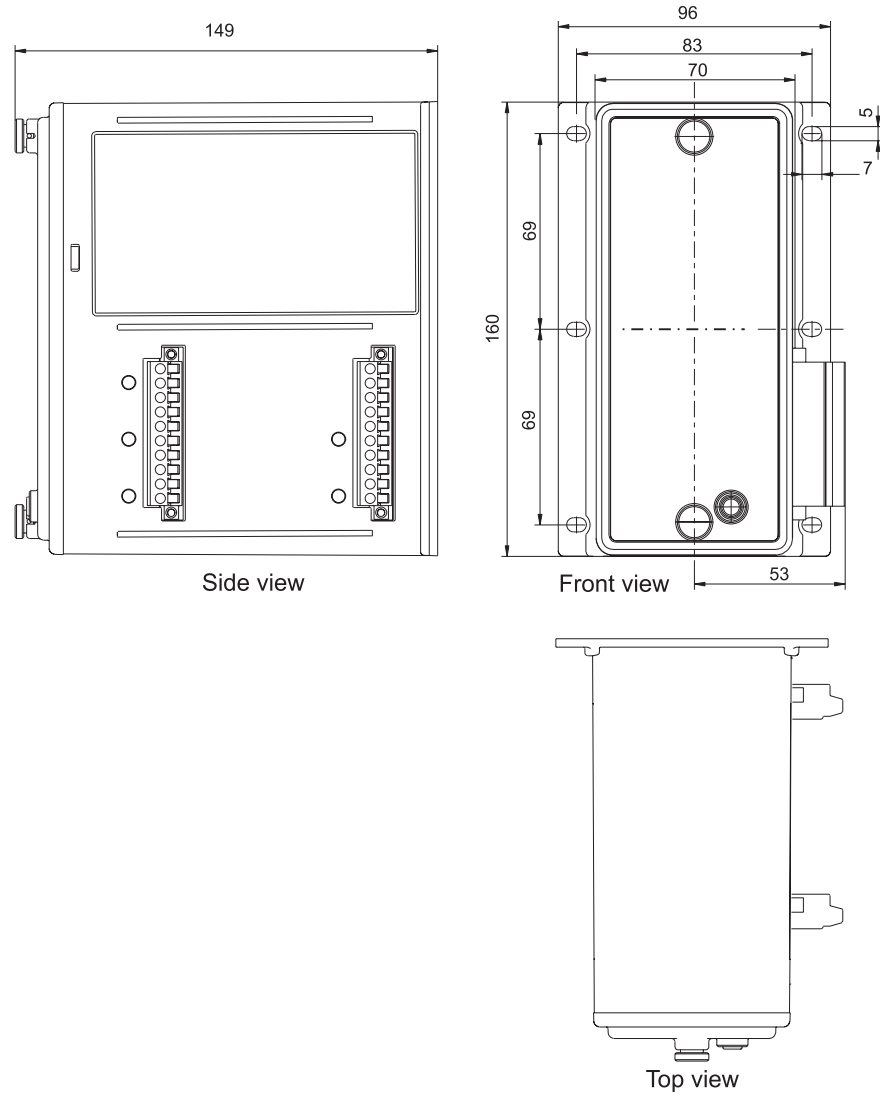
Relay mounting and dimensional details REJ603 without HMI
